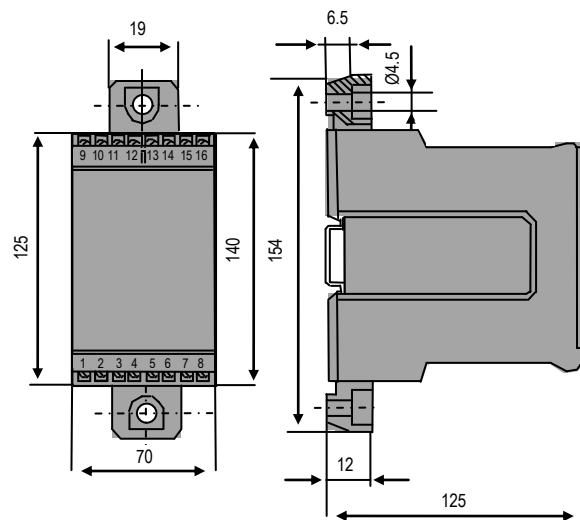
RISH *Ducer* E13 in housing E16 with the screw hole brackets pulled out for wall mounting.
